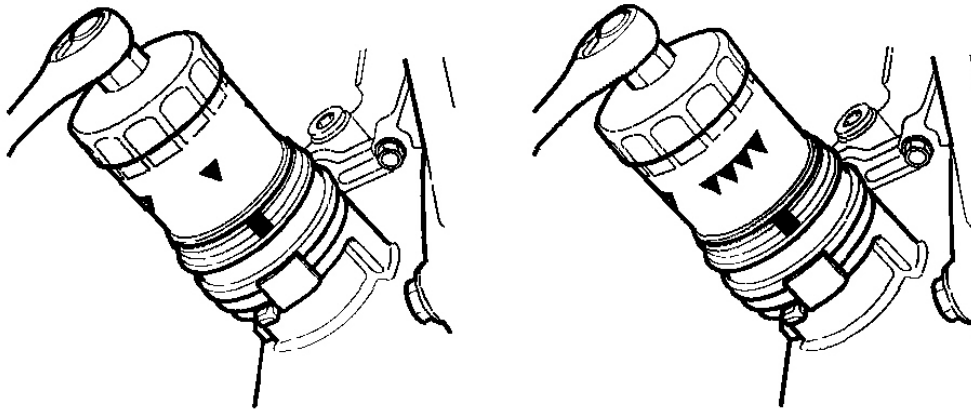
Tightening Oil Filter Clockwise With Special Tool
